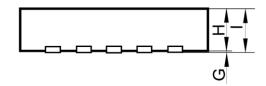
DFN(3x3)-10 Package dimensions (side view)
